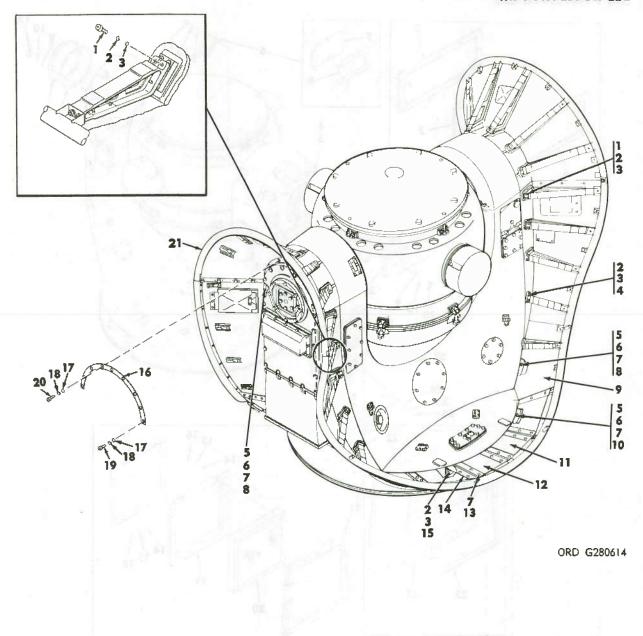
MOUNTING ASSEMBLY, TELESCOPE /8015860/-PARTIAL EXPLODED VIEW
